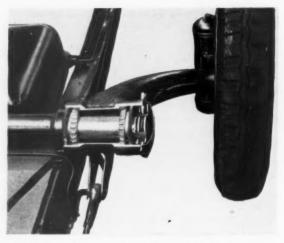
A view of a sectioned pivot bearing and damper assembly
